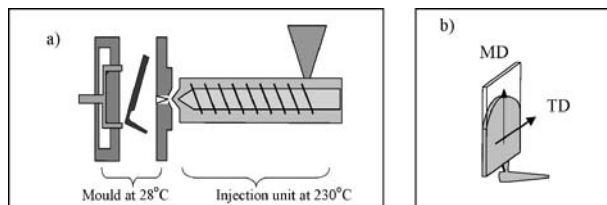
Schemes of injection-moulding process (a) and injected sheet of 100 × 100 mm (b).
